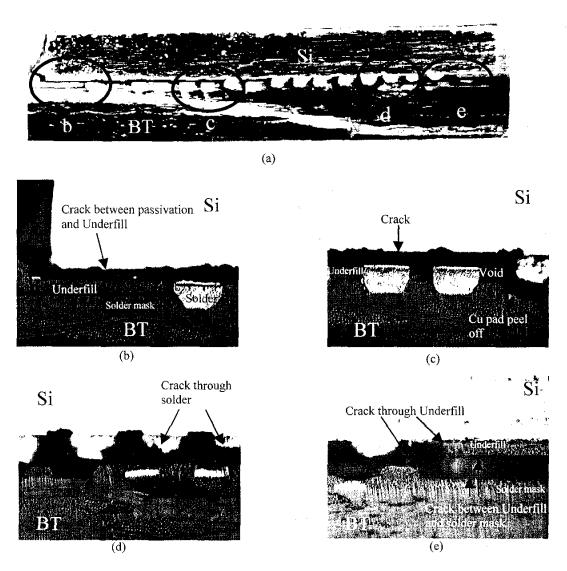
(a) Overall view of the cross-section after the shear test; (b) to (e) close-up pictures showing local failure mechanisms
